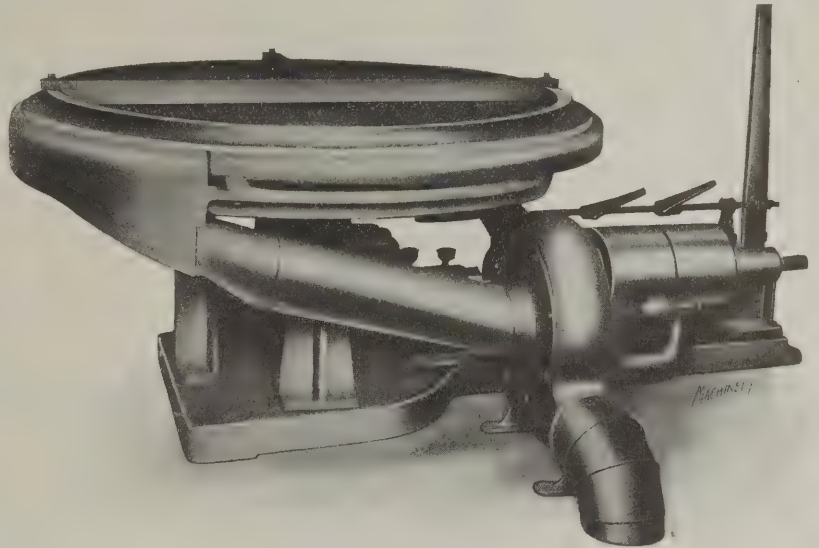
Rear View of Vertical Disk Grinder, showing Exhaust System
